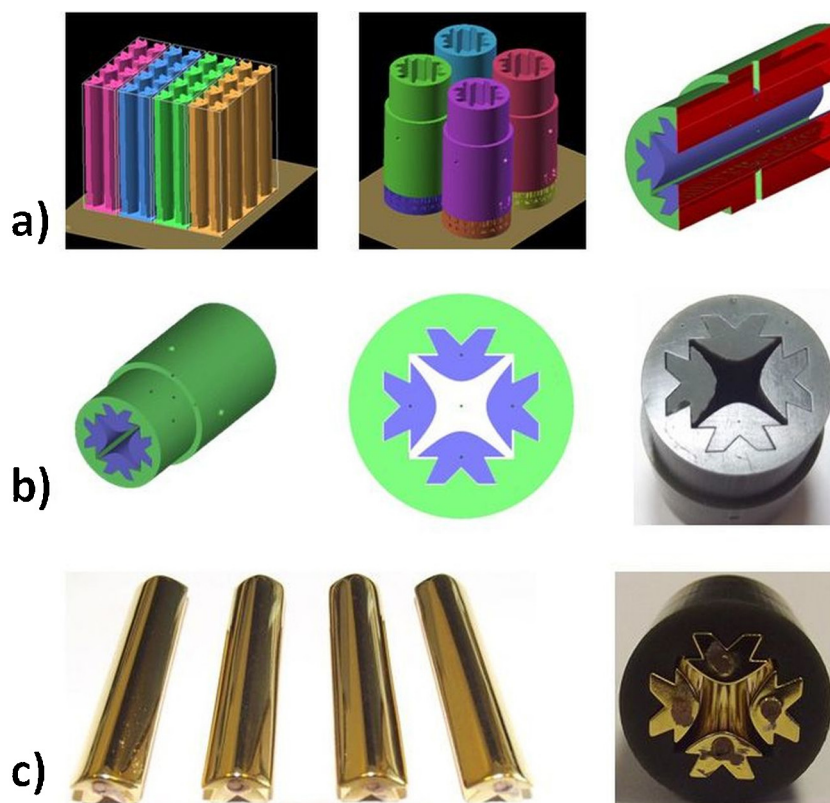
Design, fabrication and assembly of DLP linear ion trap: (a) fabrication design stack of DLP LIT rods and housings on a machine build envelope with vertical cross section of LIT assembly, (b) fabrication design of LIT assembly with non-coated prototype, (c) electroplated LIT rods and final rod assembly in ceramic resin housing.
